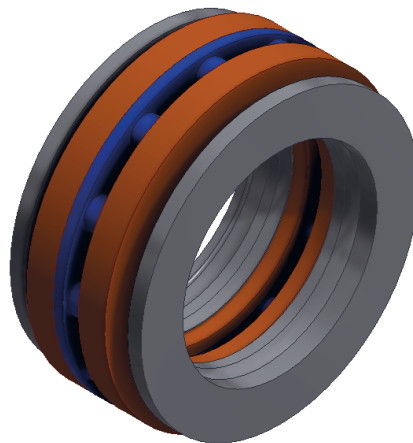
Uncut wiper packing with: oil wiper rings (grey), metallic wedge rings (brown) and elastomer spring (blue)
